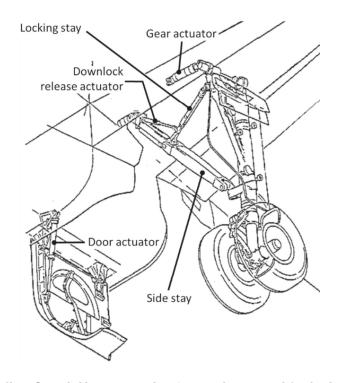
A Main Landing Gear L/H representing 'near wing gears' (uplocks not shown) (source Airbus)
